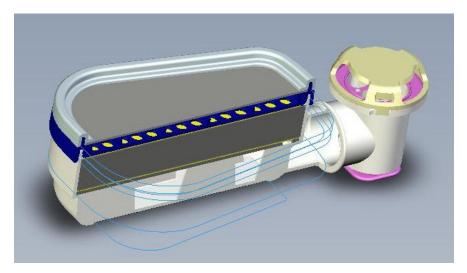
Design Of The CO FSR For Integration Into The Hybrid SCSR Is Complete
